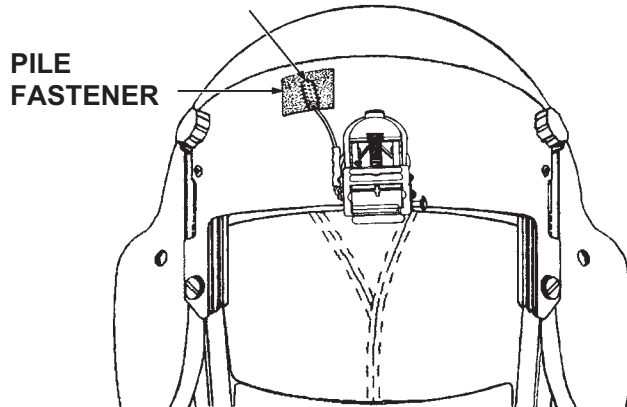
ANVIS Mount and Pile Fasteners Installed
